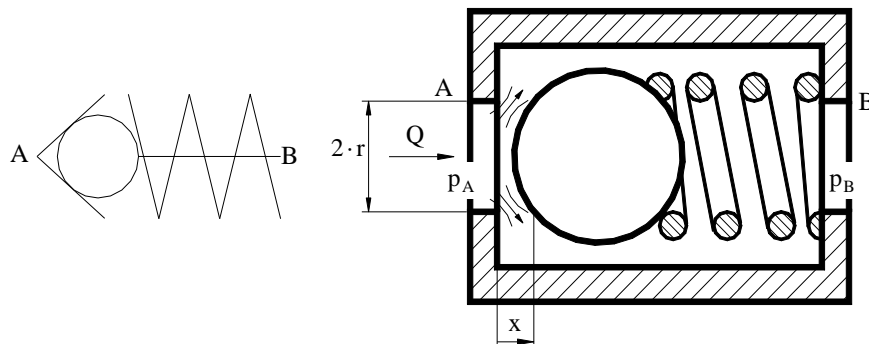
The standard symbol and a schematic drawing of a check valve.
